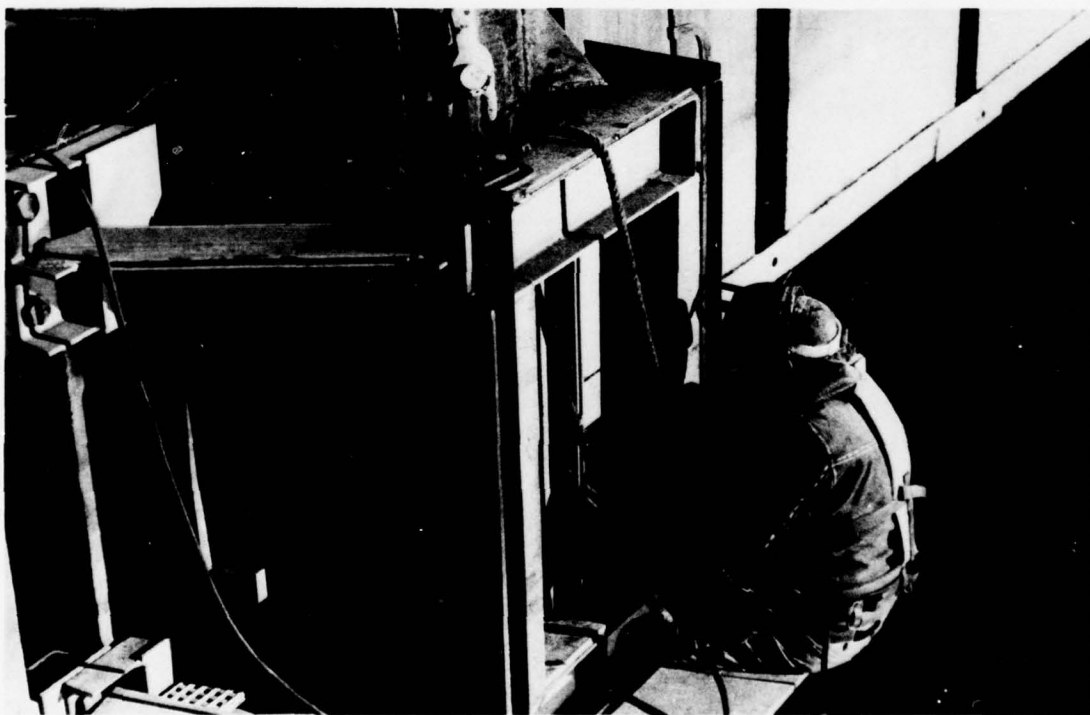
Welder on platform prepares to weld lower triangular bracket plates to pile for external spudwell. Note completed upper brackets.
